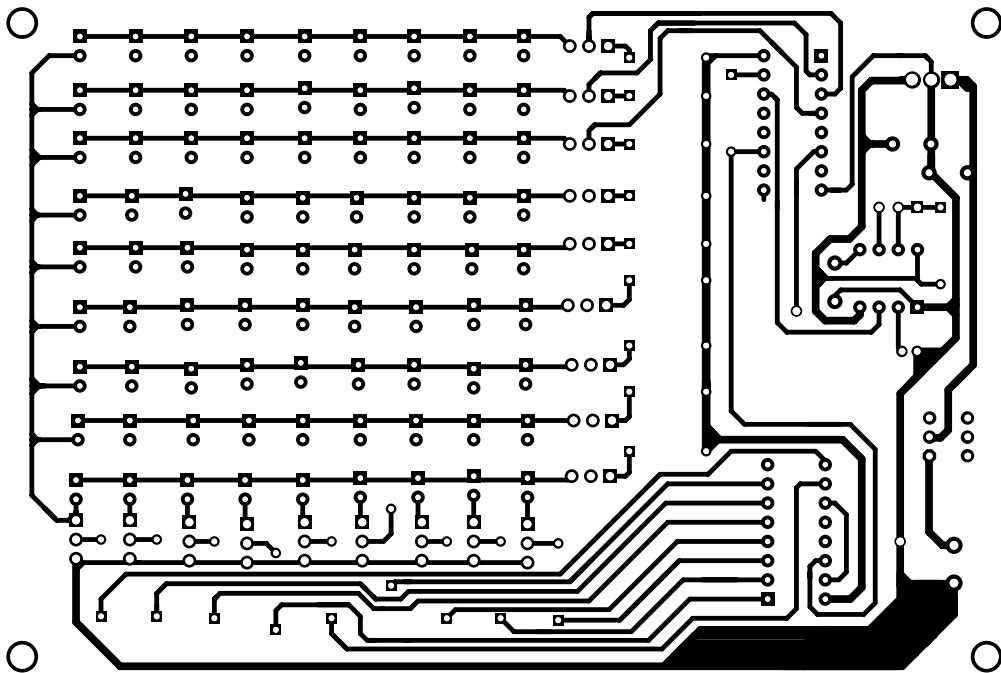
Actual-size, solder-side PCB layout of the 81-LED chaser light
